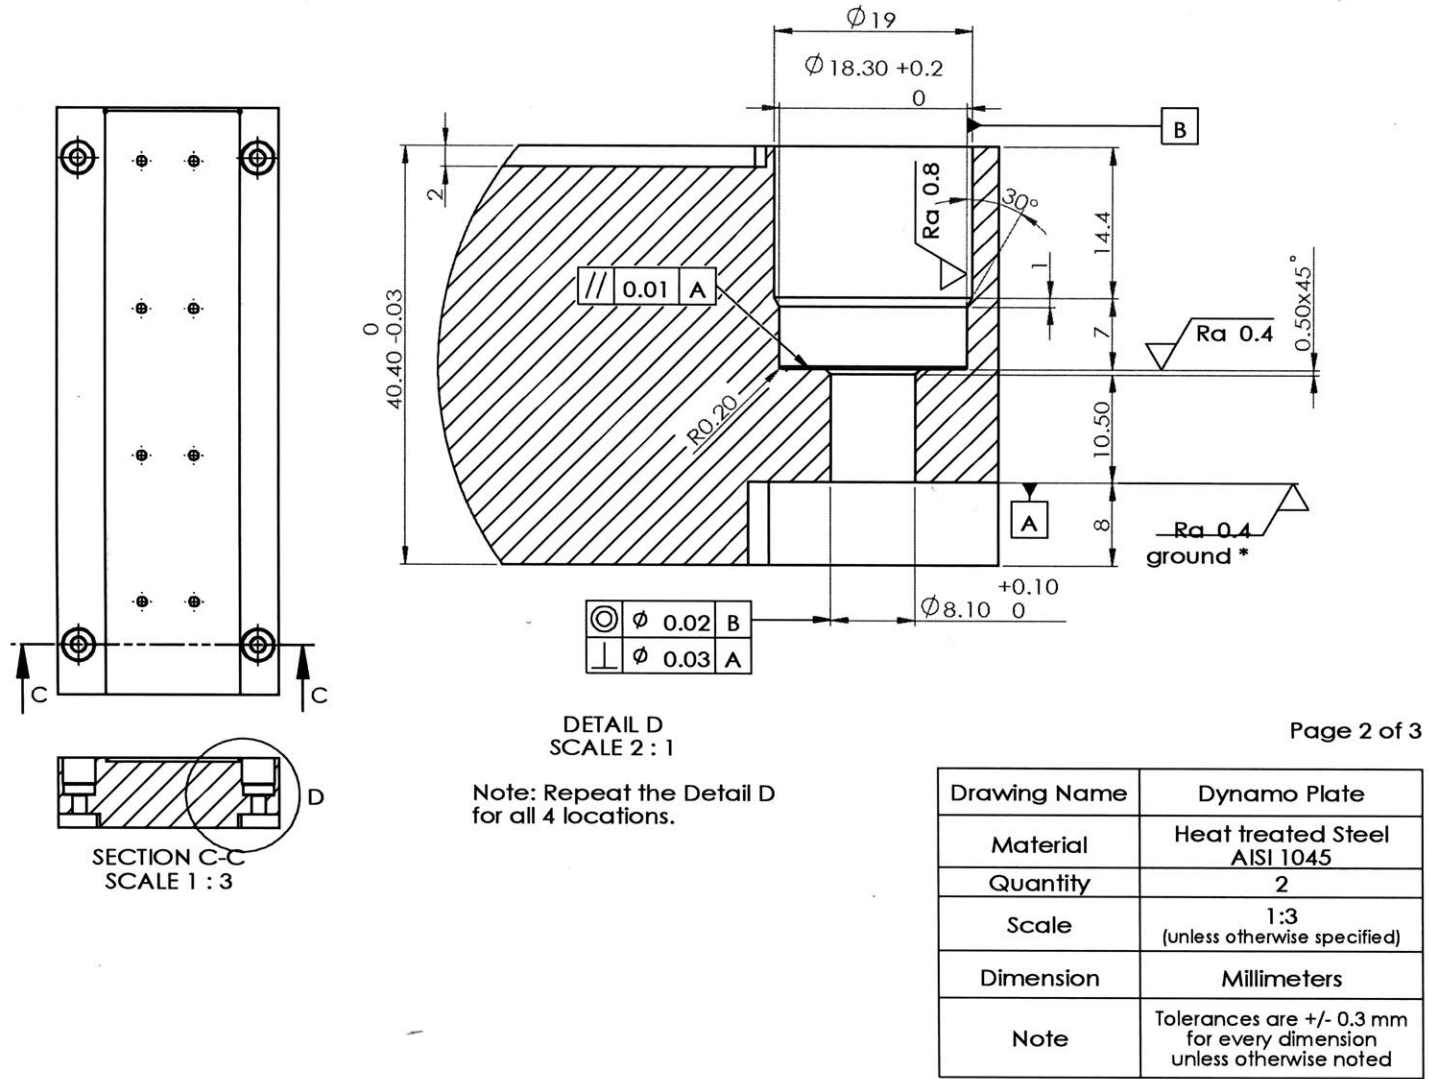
Drawing of the mounting plate for the conventional motor (TL18 by Tecnotion), also serving as the dynamometer upper plate. Page 2 of 3.
